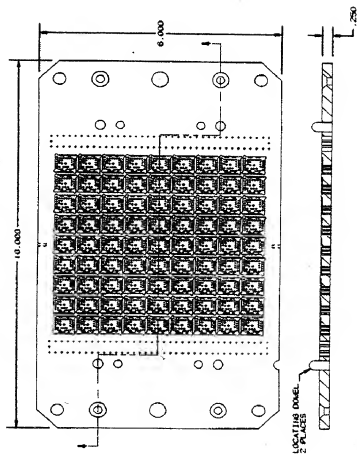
Typical multipurpose boat design for ceramic BGA packages. The boat is used for the low volume method of die attach, lid seal and ball attach.
